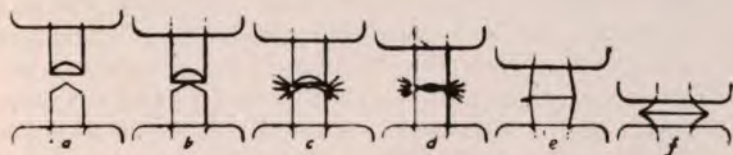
Successive steps in producing weld by electro percussive welding.
